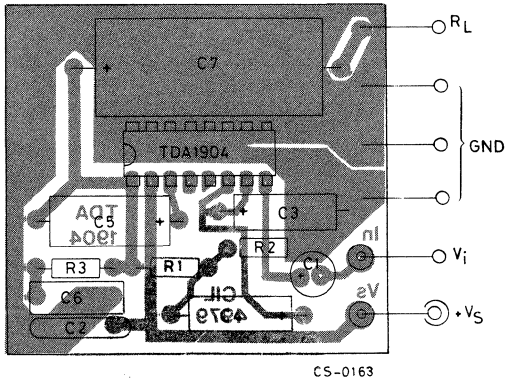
P.C. board and components layout of fig. 1 (1:1 scale)
